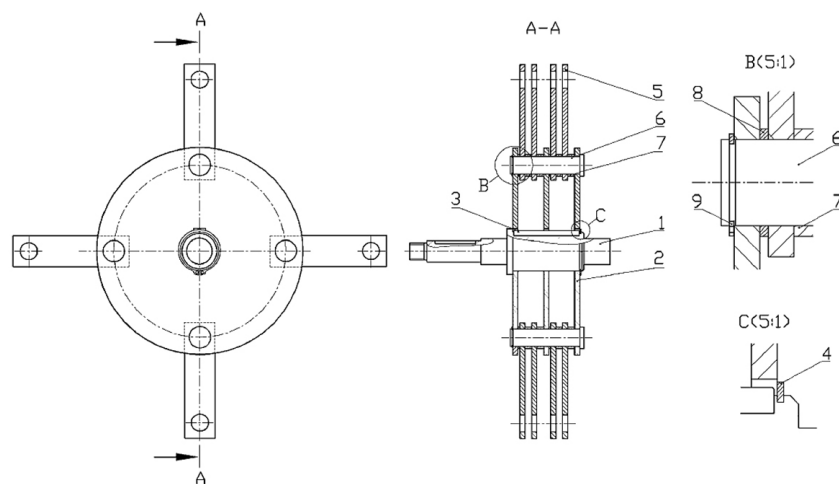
Design solution of a conventional hammer shredder rotor with rectangular hammers $\alpha = 0^\circ$: 1-rotor shaft, 2-rotor carrier disc, 3-prismatic key, 4-stopper ring, 5-hammer, 6-pin, 7,8-spacer ring, 9- stopper ring
